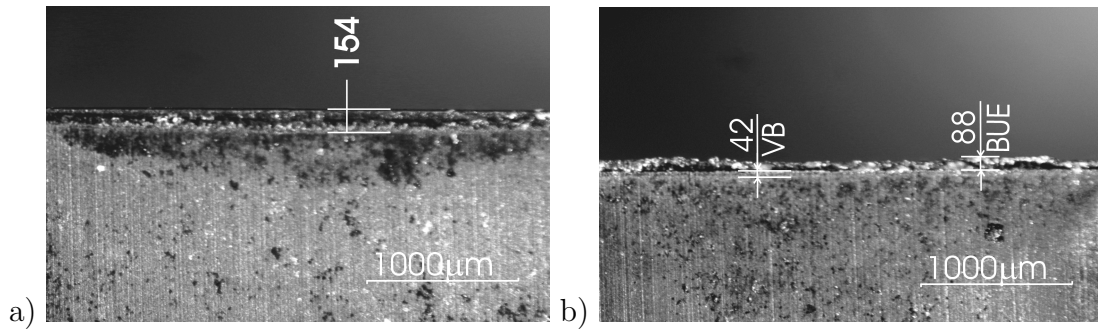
Flank wear of the grooving tool at 20 m/min: a) Conventional cutting, b) Laser assisted (2 kW) cutting.
